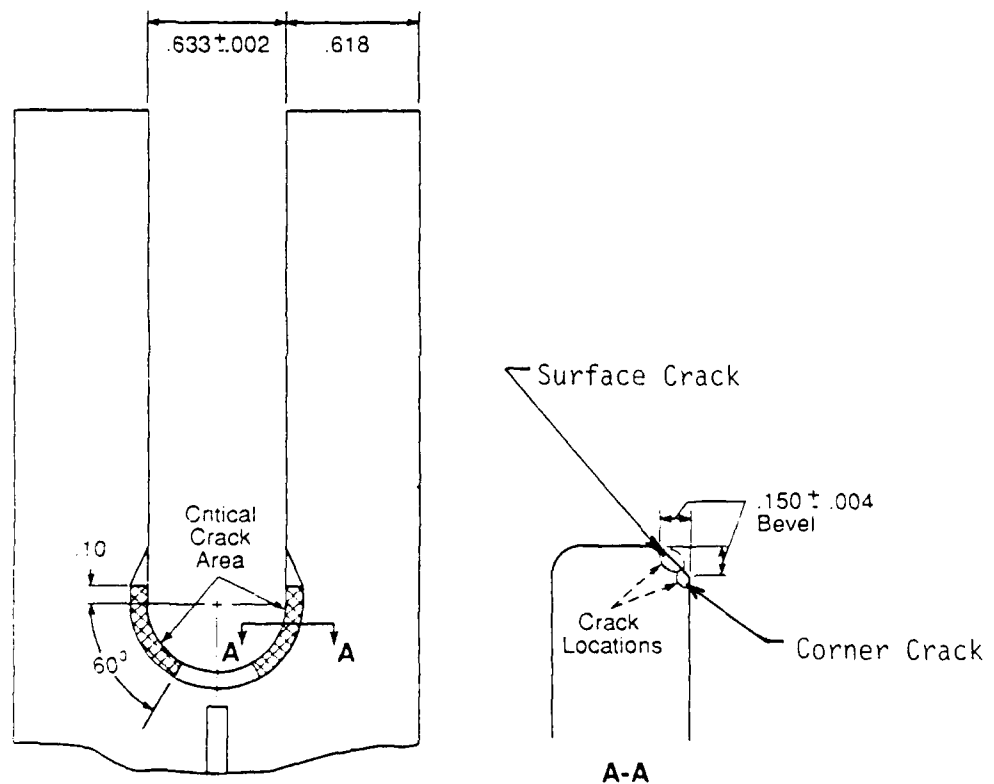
Drawing of the modified geometry of the lug, showing the critical inspection area and critical flaw locations.
